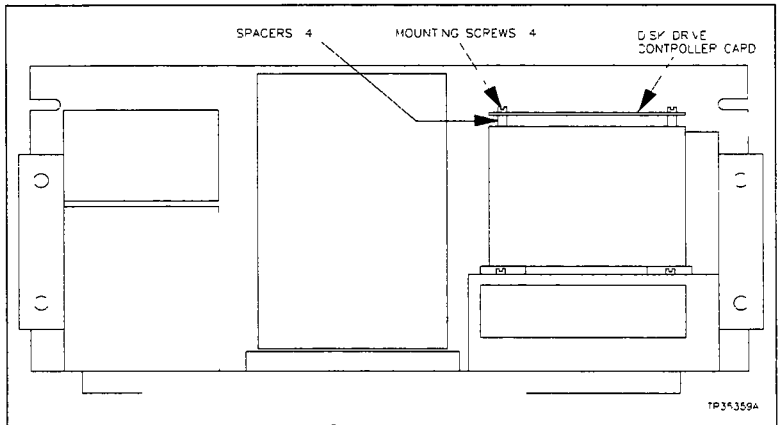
5 Disk Drive Controller Card Removal for IIOIC20A
